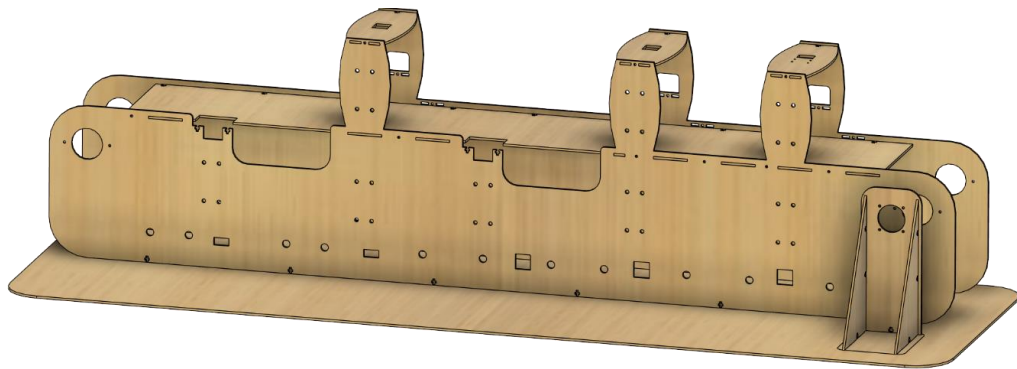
Assembled 3D design of conveyor belt: iteration 3
